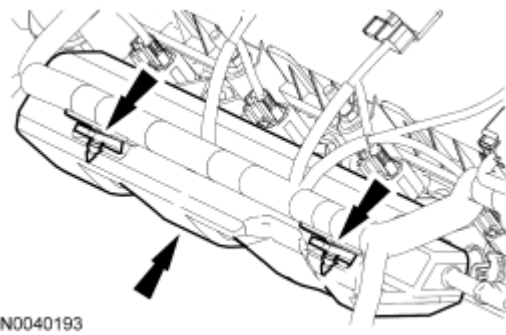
Locating Pin-Type Harness Retainers And Remove Fuel Supply Rail Insulator
